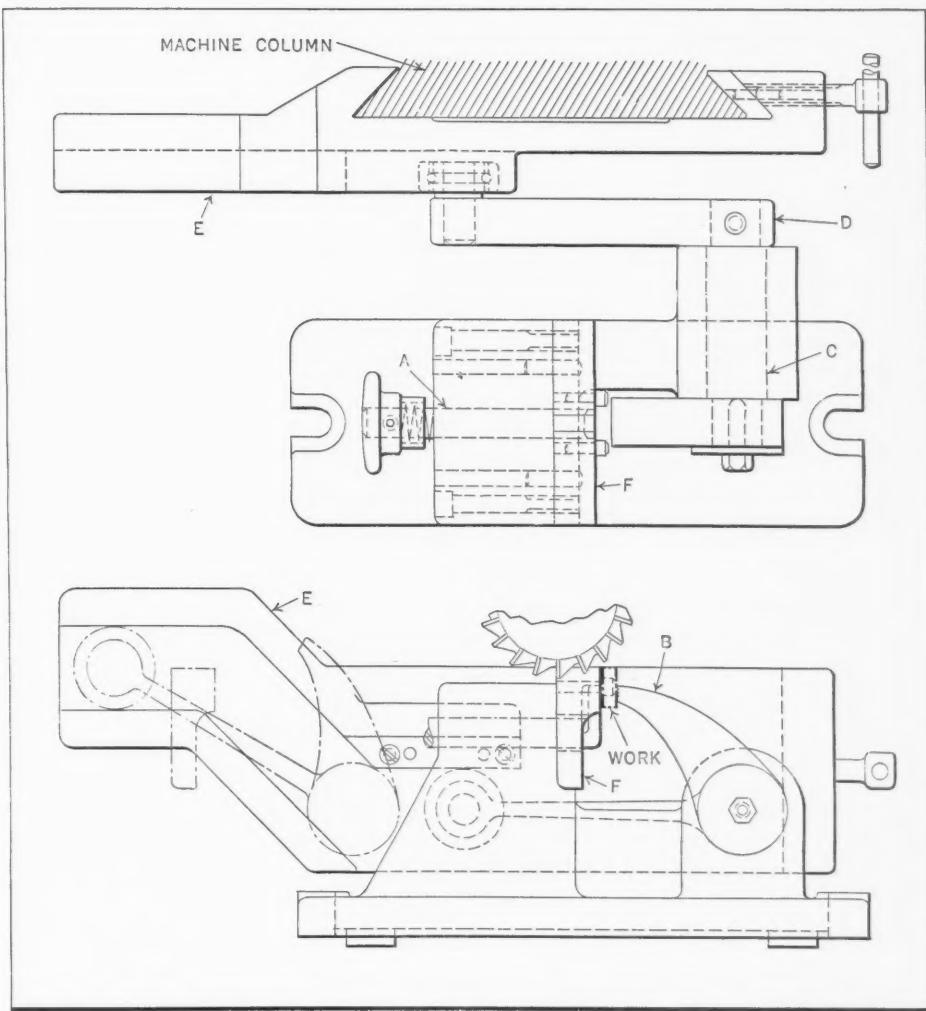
Hand-miller Fixture in which the Work is Automatically Clamped by a Cam on the Machine Column
